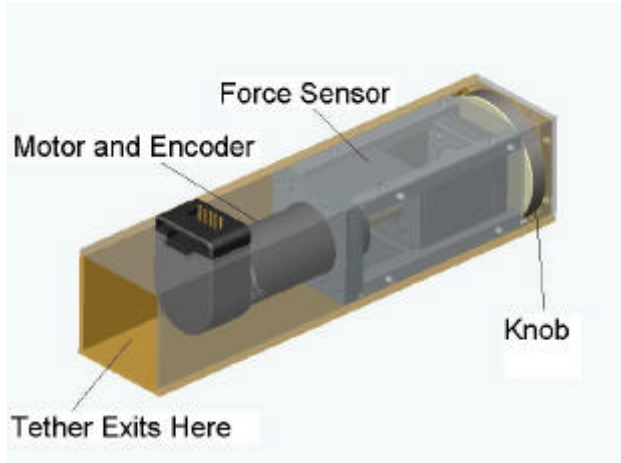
CAD model of implemented handheld system. Shows cutaway of rectangular housing with motor/encoder, force sensing unit and thumbwheel
